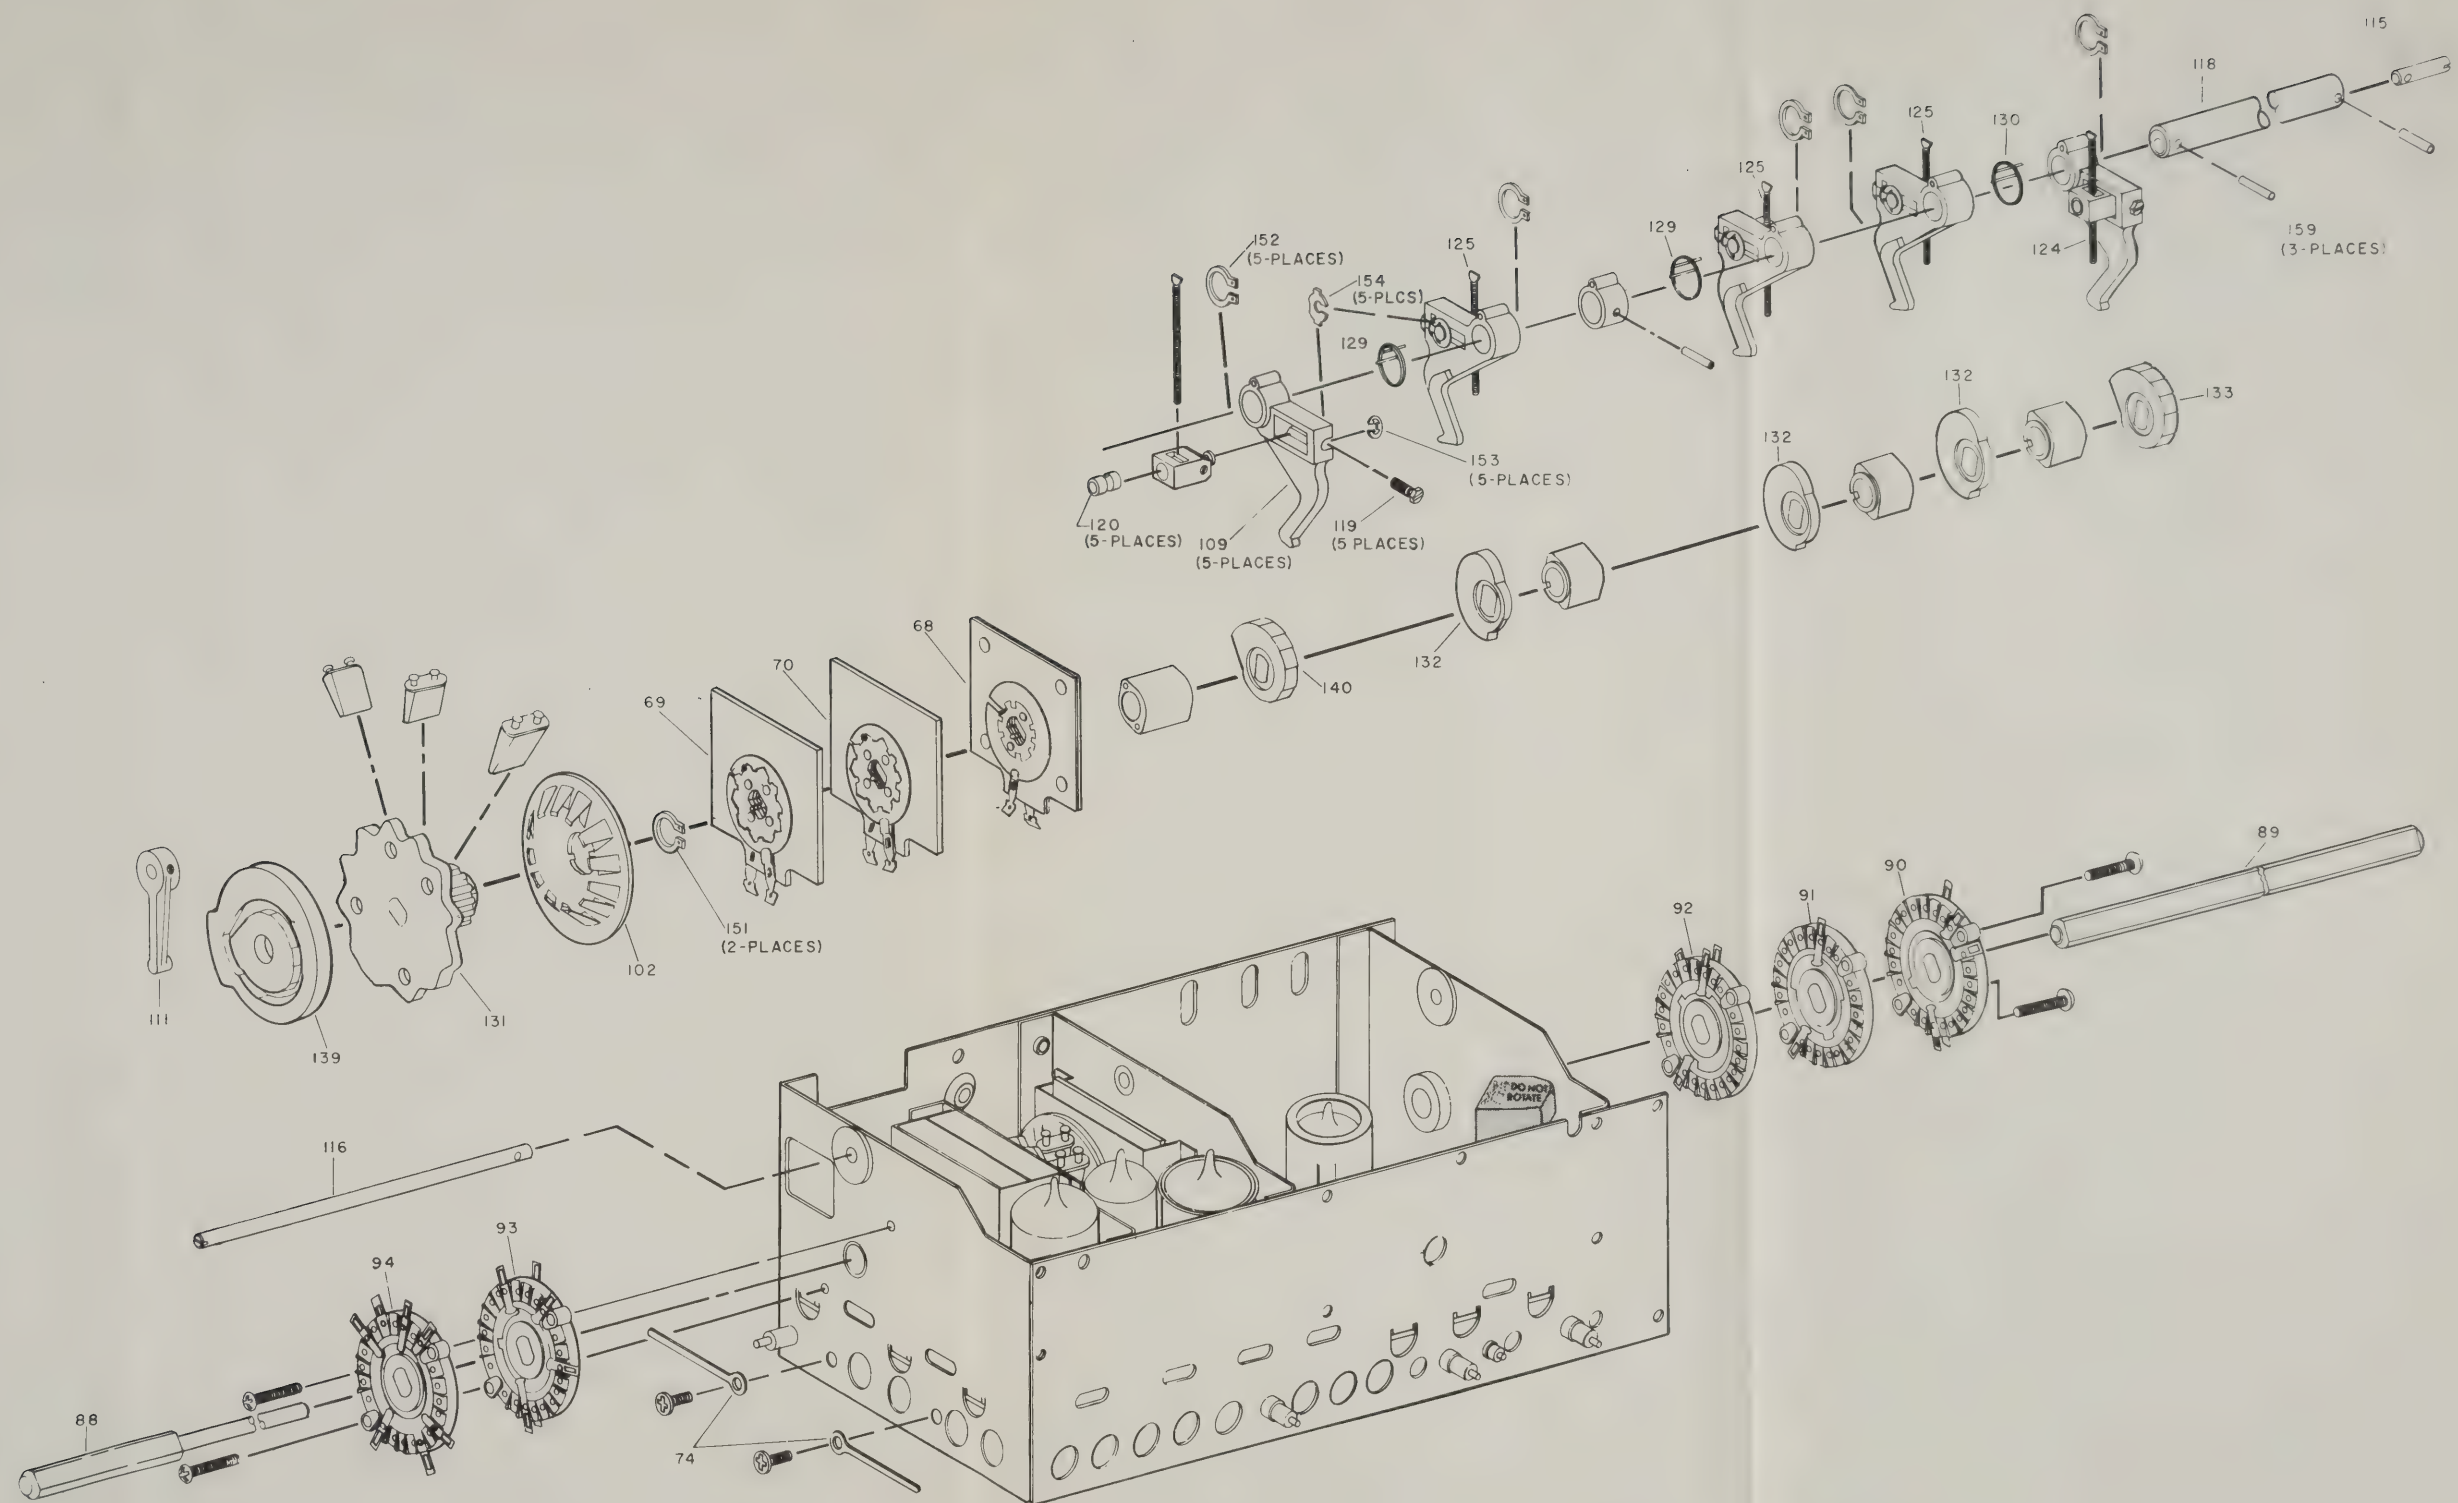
Cessna DME 800 Receiver/Transmitter R.F. Section Assembly
